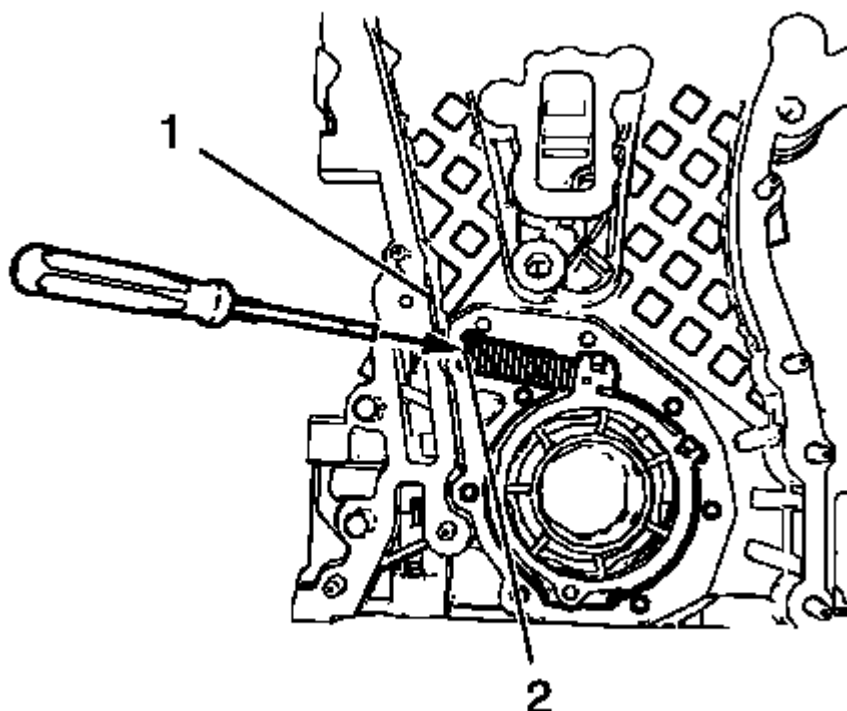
Oil Pump Slide Spring Windings And Engine Front Cover Edge
